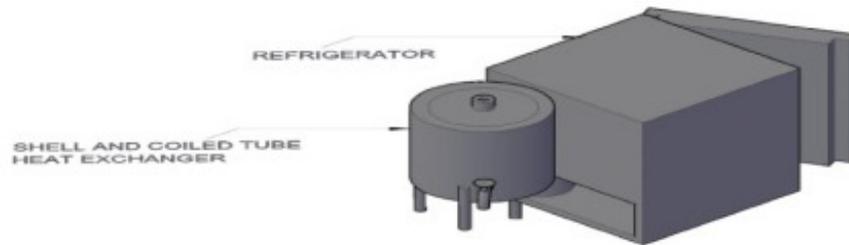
Assembly drawing of fitted shell and coiled tube heat exchanger to the refrigerator
